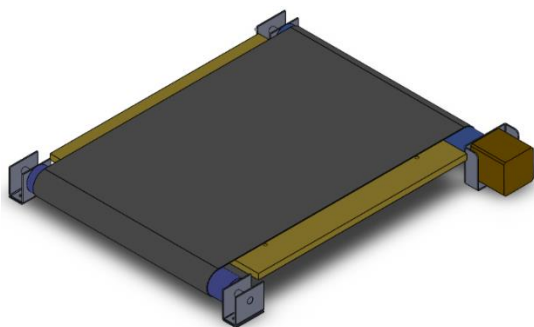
Axis and manufacturing platform view of the conveyor system of the continuous automatic 3D printing device
